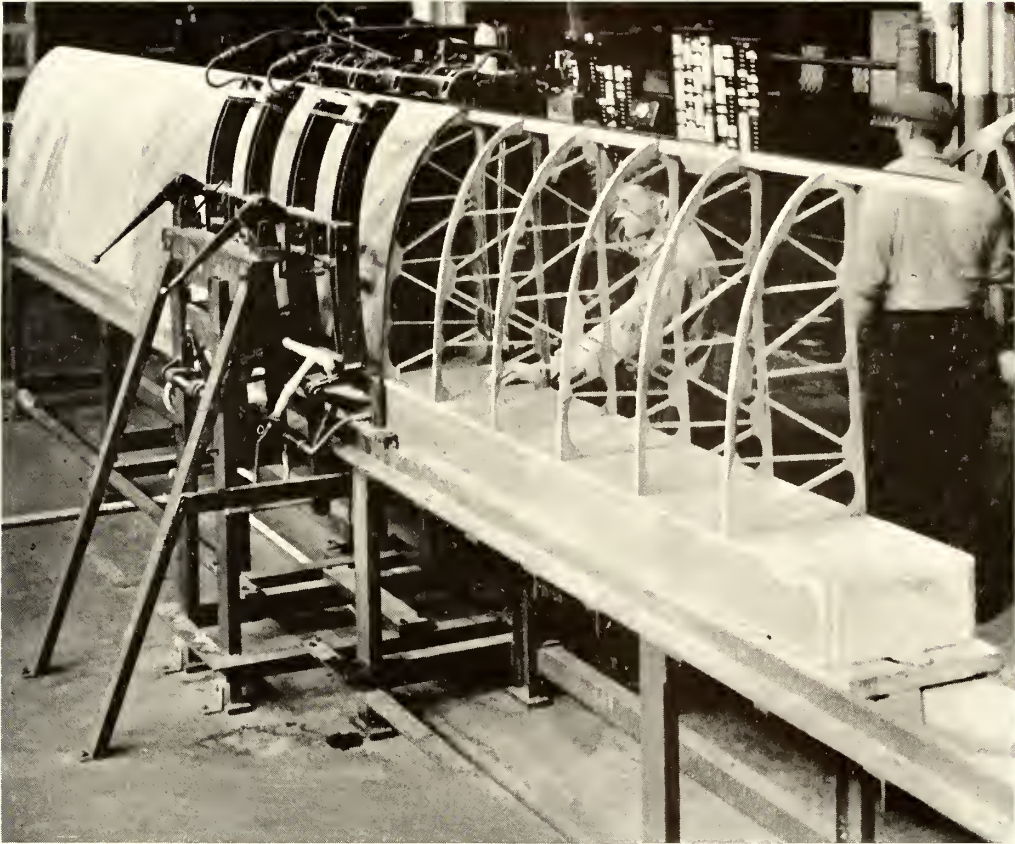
Steam-heated pressure jig used to attach plywood skin to framing members.
